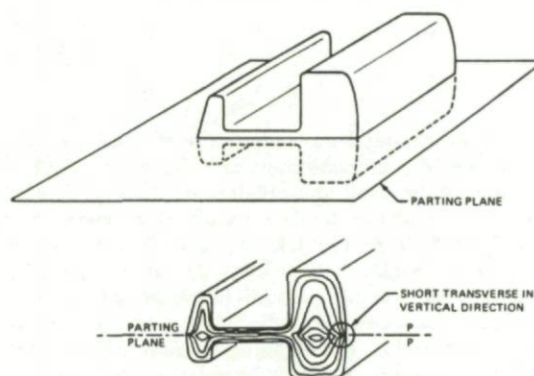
Schematic representation of the grain flow in a section of a typical die forging. (Ref. 13-11)
